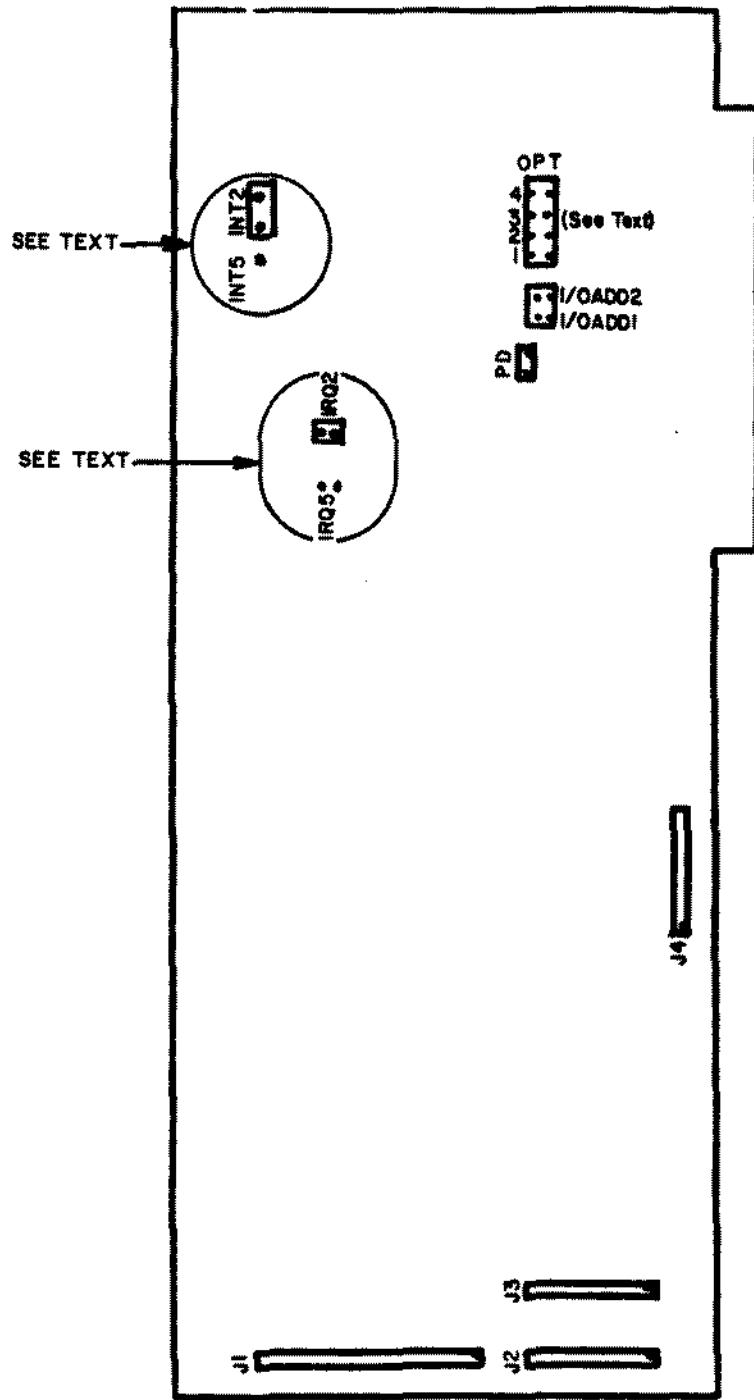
Xebec Hard Drive Controller Board for Tandy 1000/1200.
